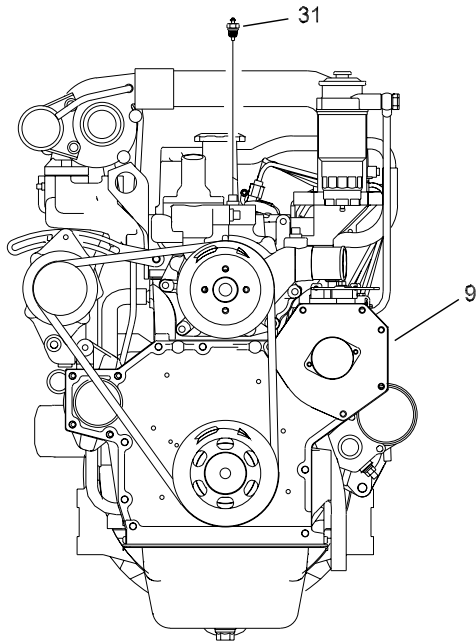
ENGINE SUBASSEMBLY, CUMMINS (SHEET 1 OF 2)
